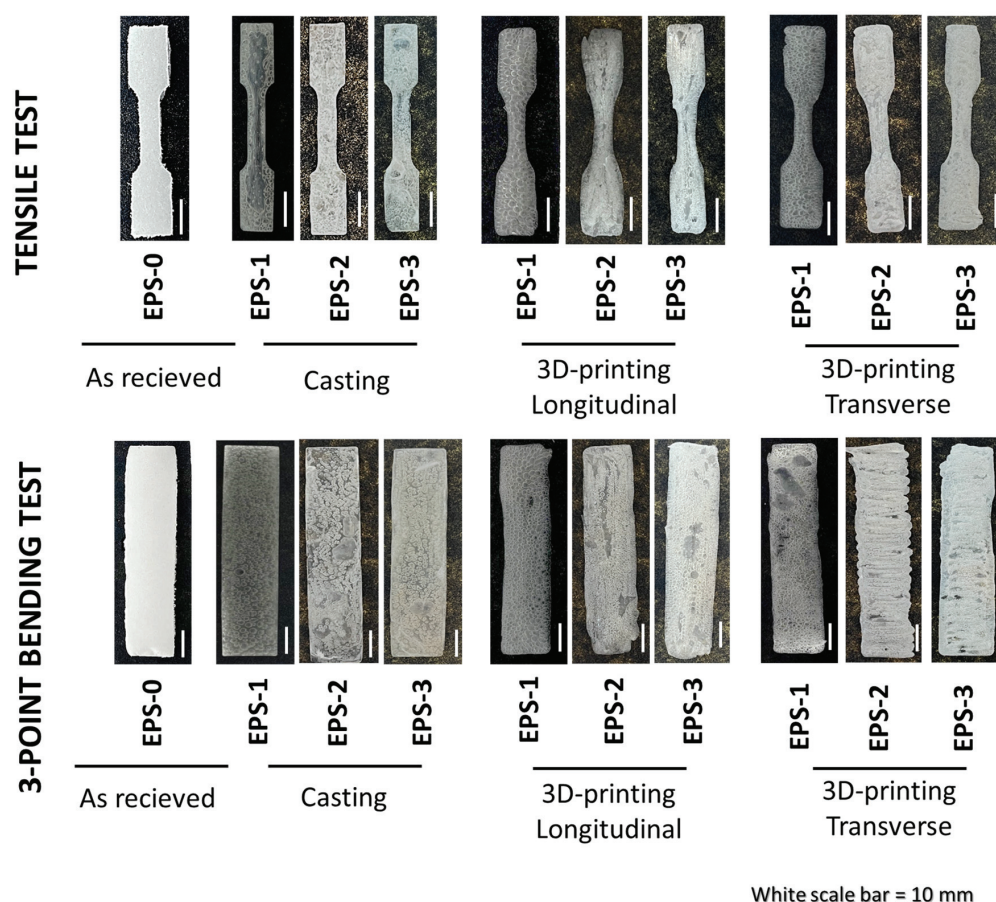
Parts obtained for the tensile and the 3-point bending tests with the different manufacturing methods: CNC machining of as-received EPS waste (EPS-0), casting (EPS-1 to 3), and 3D printing (EPS-1 to 3) in the two proposed printing orientations, longitudinal and transverse.
